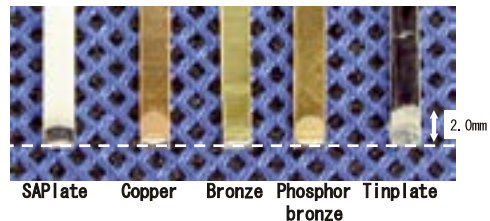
Appearance of samples after reflow soldering test (Sn-58Bi solder paste)
